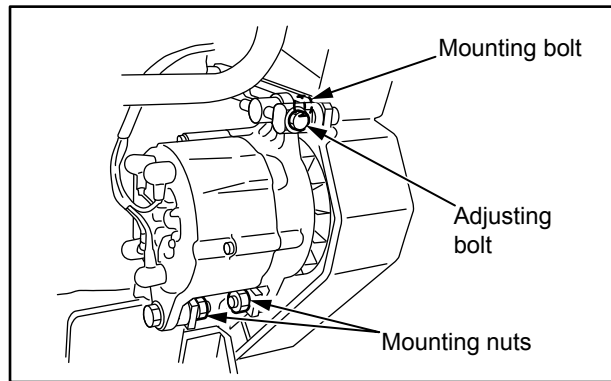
Belt Tension (Alternator Side) - Adjust
